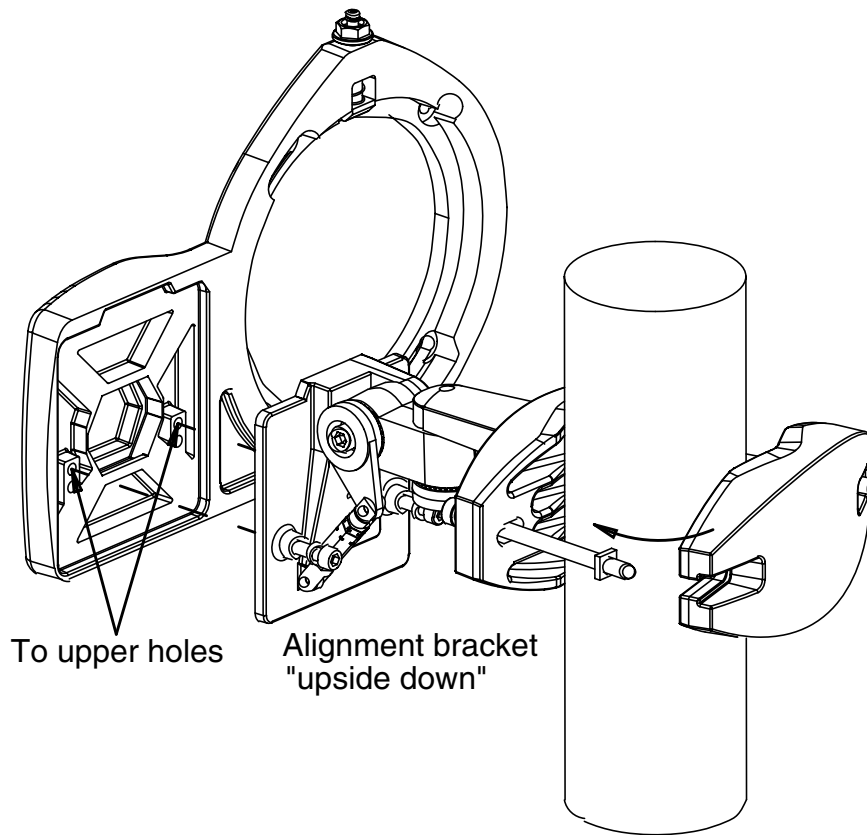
Mounting the alignment bracket and the fastener on the other side of the pole
